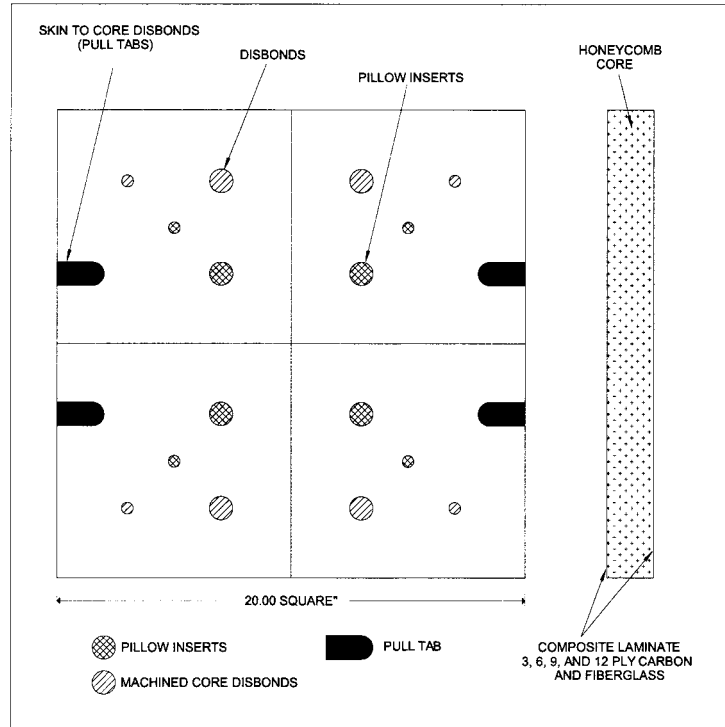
Design Drawing of Composite Honeycomb Panel Containing Four Different Construction Types and Engineered Flaws
